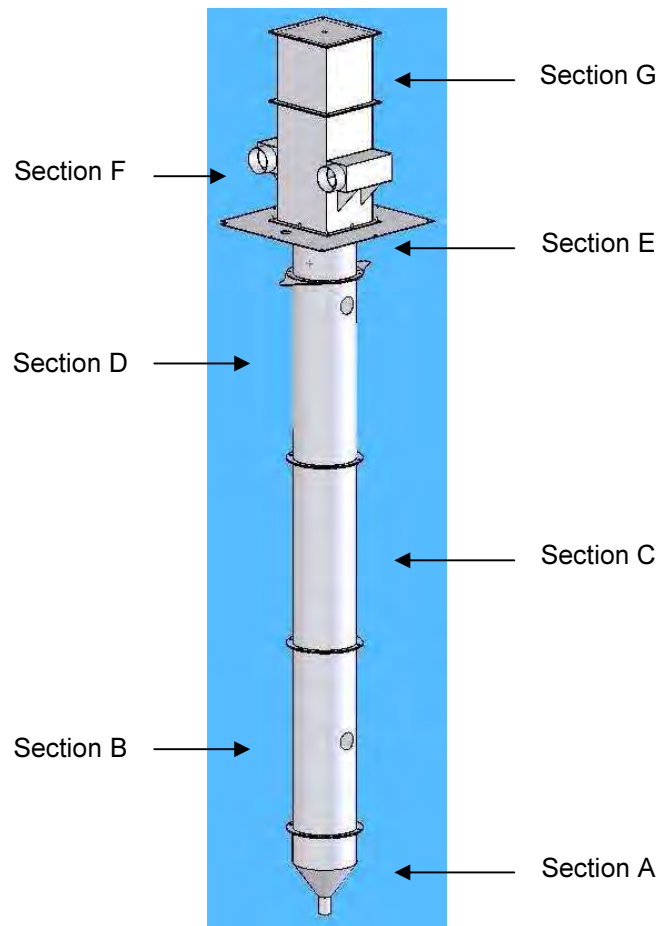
Solidworks drawing of the single cell baghouse shell
